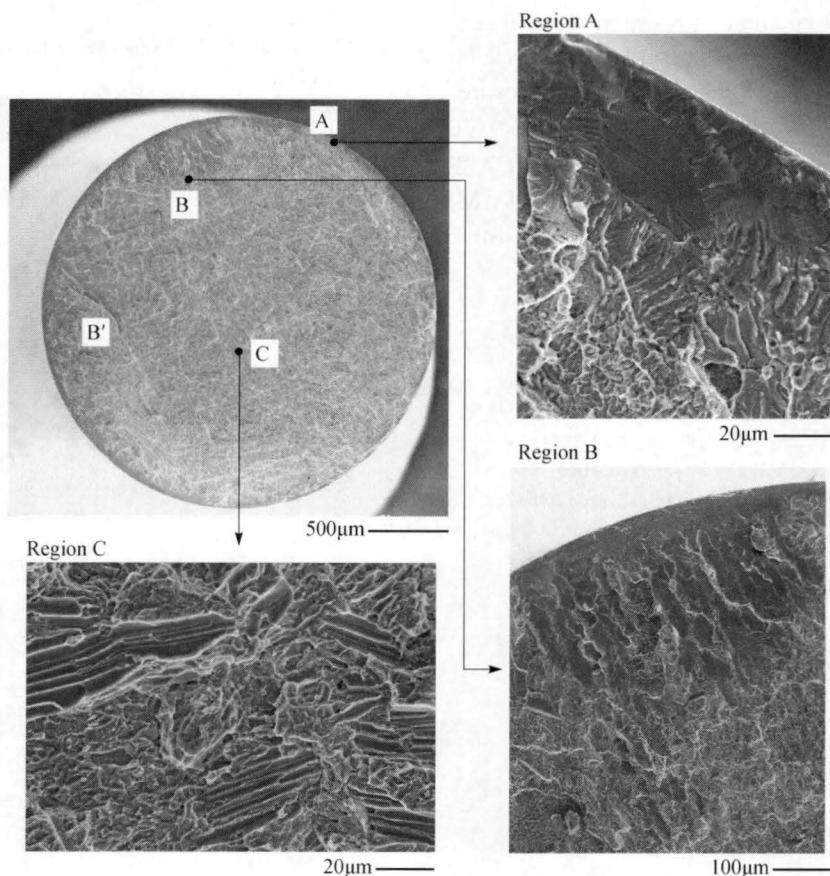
Secondary electron SEM micrographs showing the fracture surface of a machined Ti-834 fatigue specimen tested following exposure to laboratory air for 1500 hrs at 650°C. Higher circumferential faceting around the fracture surface can be observed and higher magnification SEM micrographs of the regions labelled A, B and C are also shown
